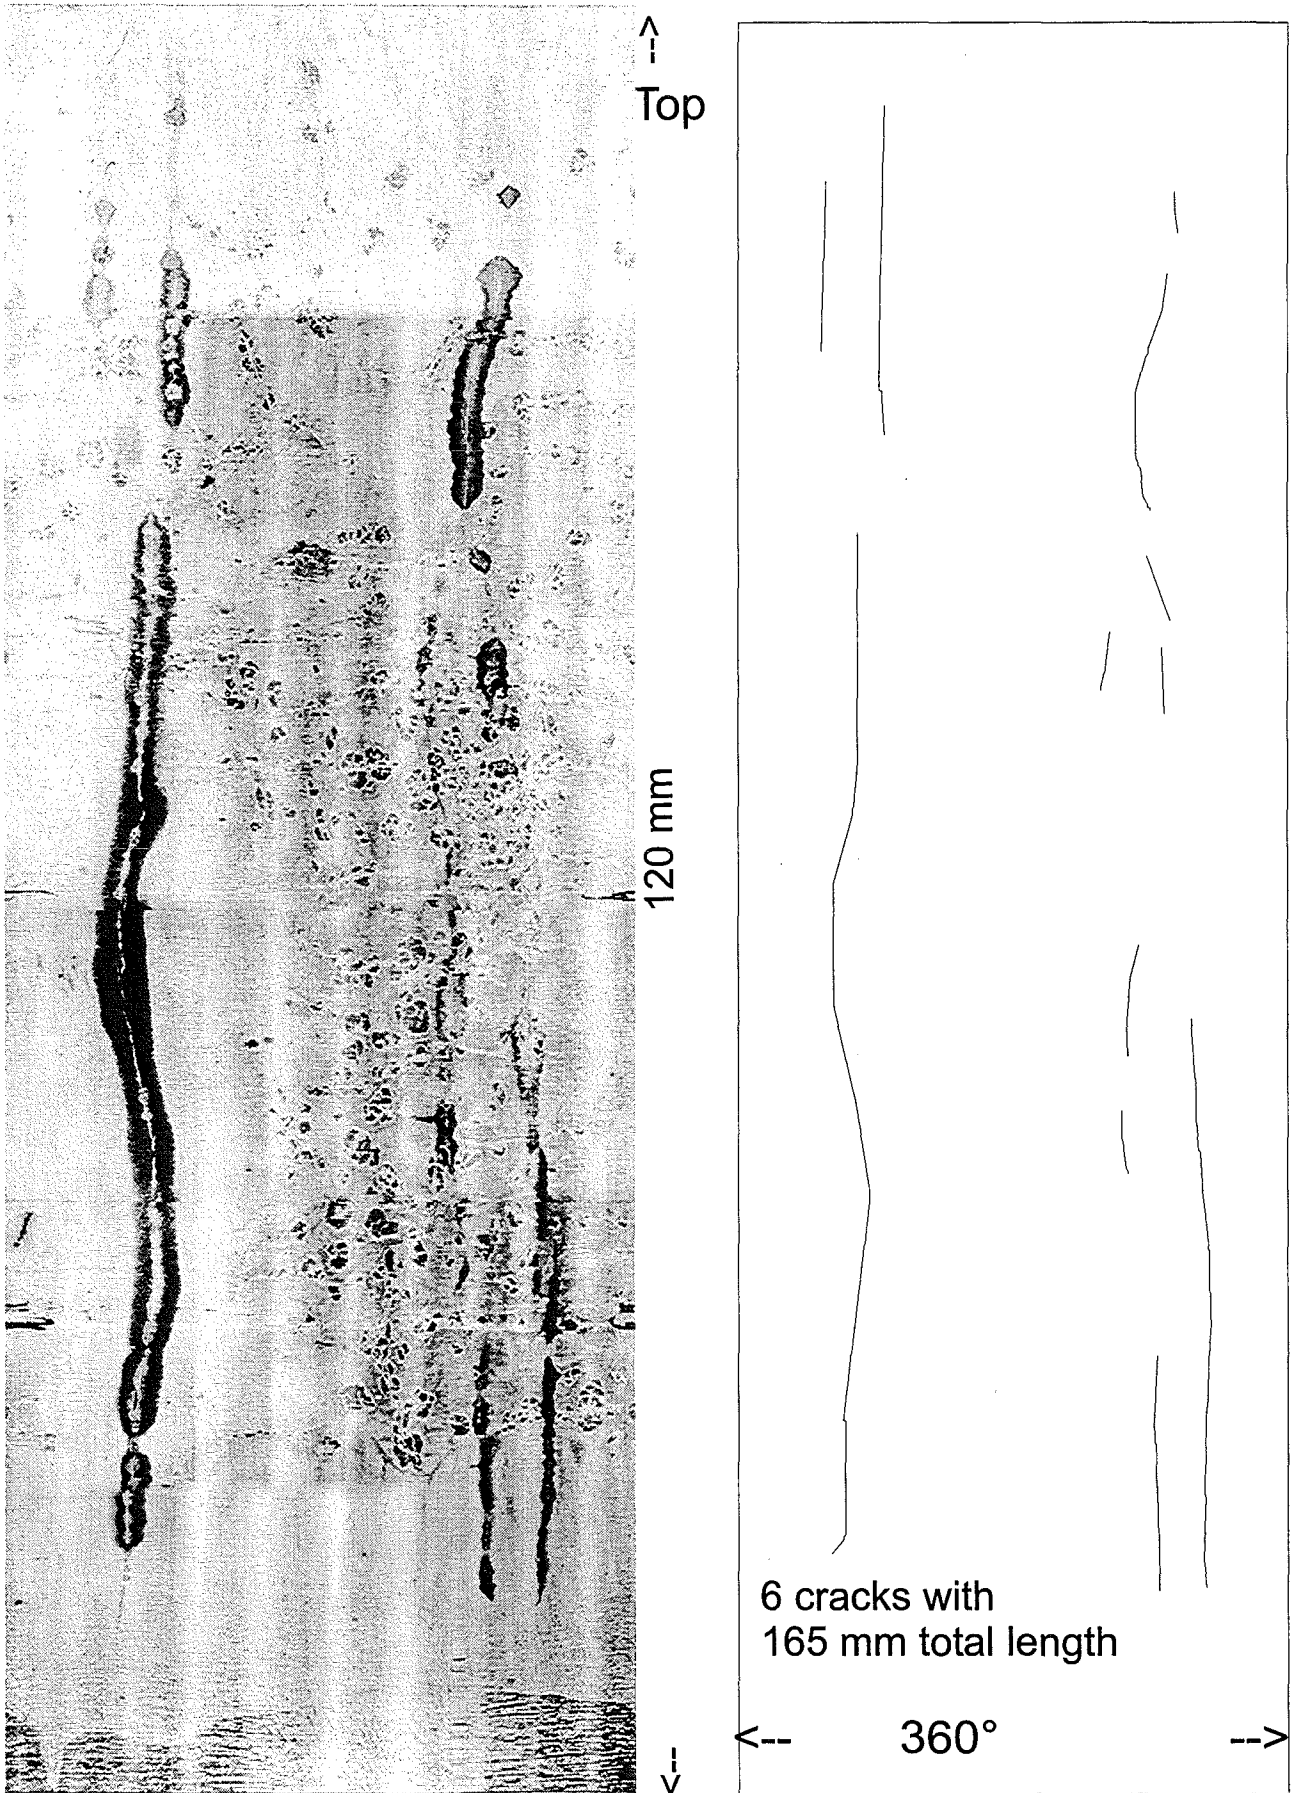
Cladding tube circumference of the experiment 18028.1 (1400 °C, 150 μm oxide layer thickness). Left: surface with red penetrant color; right: hand traced cracks.
